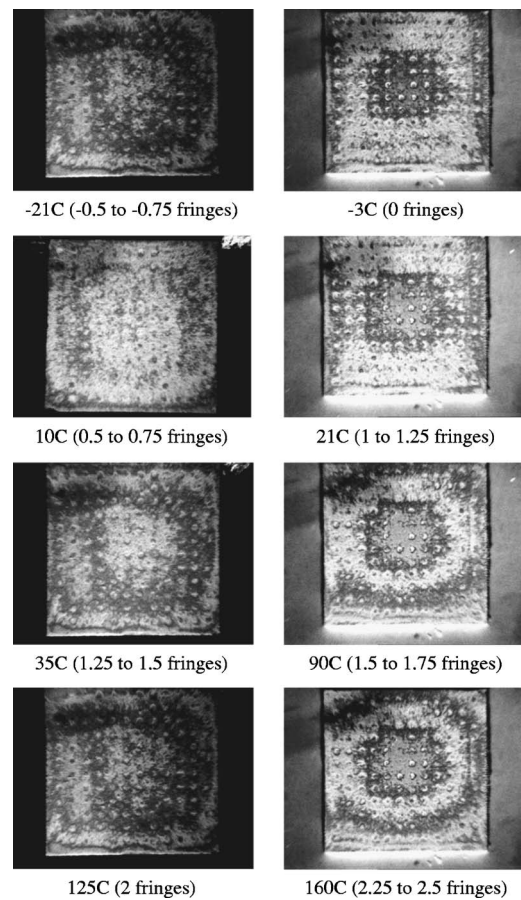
Out-of-plane displacement of fpBGA package (1 fringe = 9.24 μm)
